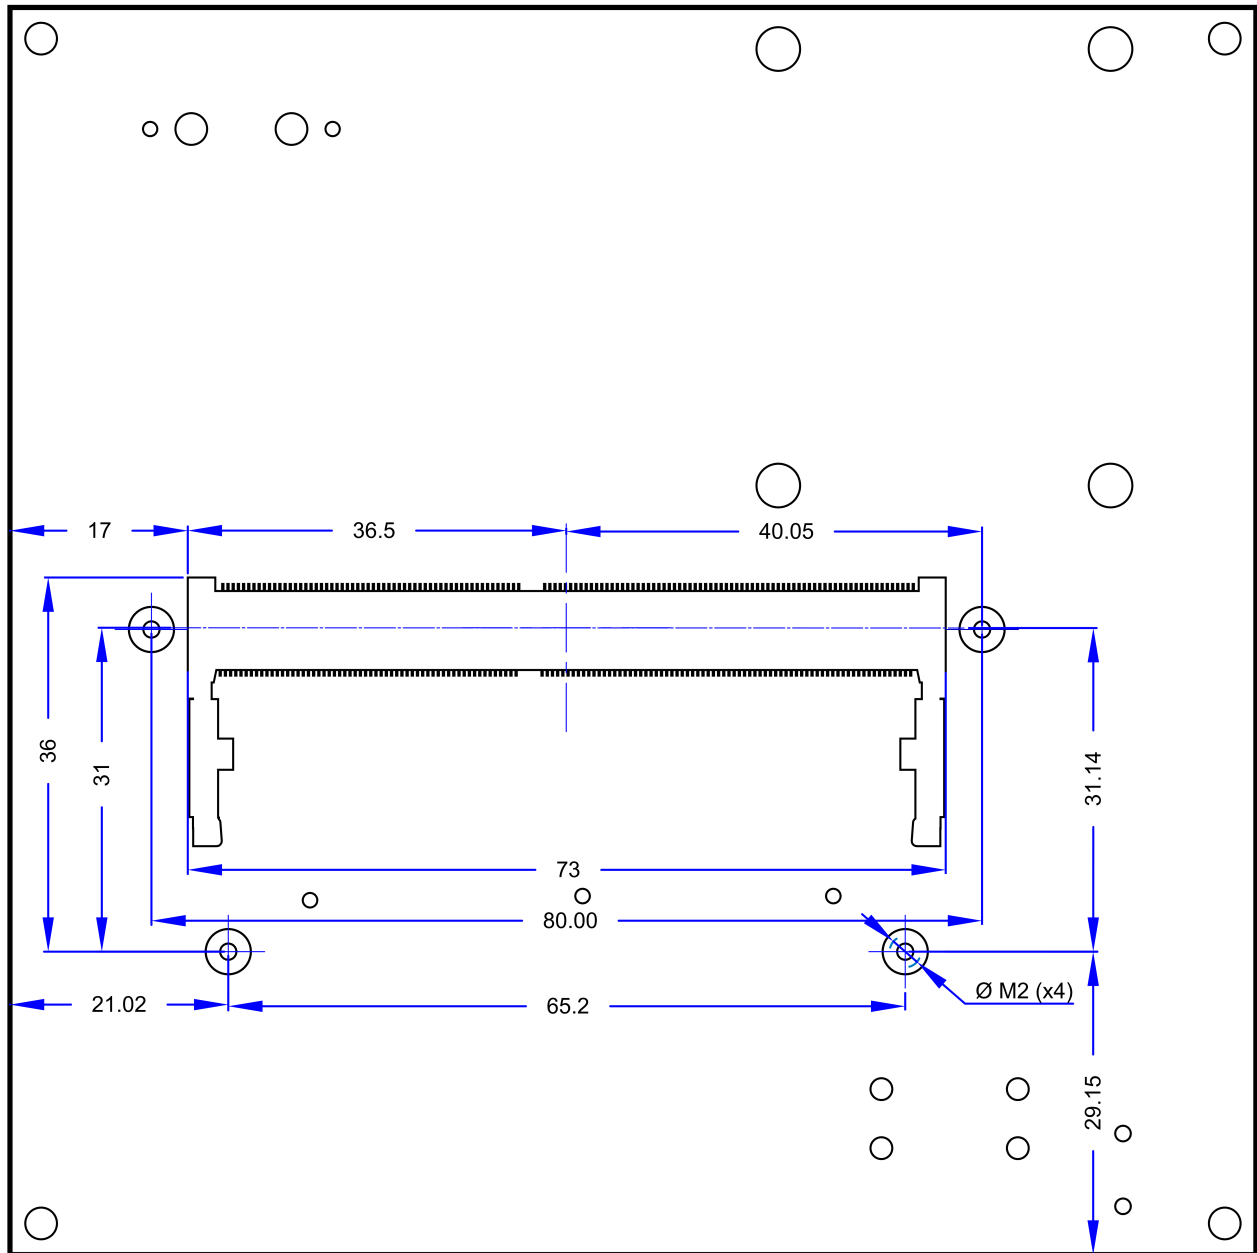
Dahlia Carrier Board SoM and spacers position (in millimeters) – top side (top view)
